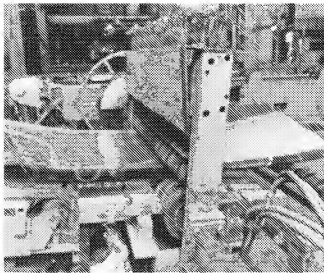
The glass and vinyl "sandwich" is fed through a special de-air machine to remove trapped air and increase the adhesion of the vinyl to the glass.(Courtesy of Ford Motor Co.)
